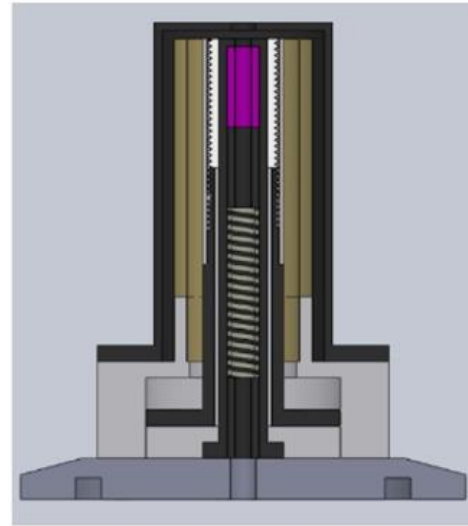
Cross-sectional view of the coaxial hollow cathode
